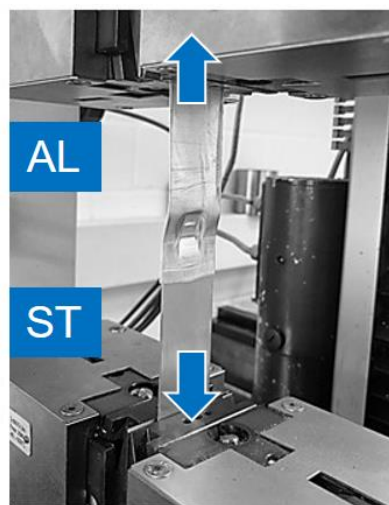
The setup for the measurement of the maximum shear force registered for a typical welded aluminum-steel specimen modified with an interlayered BTSE/ PAA thin-film.
